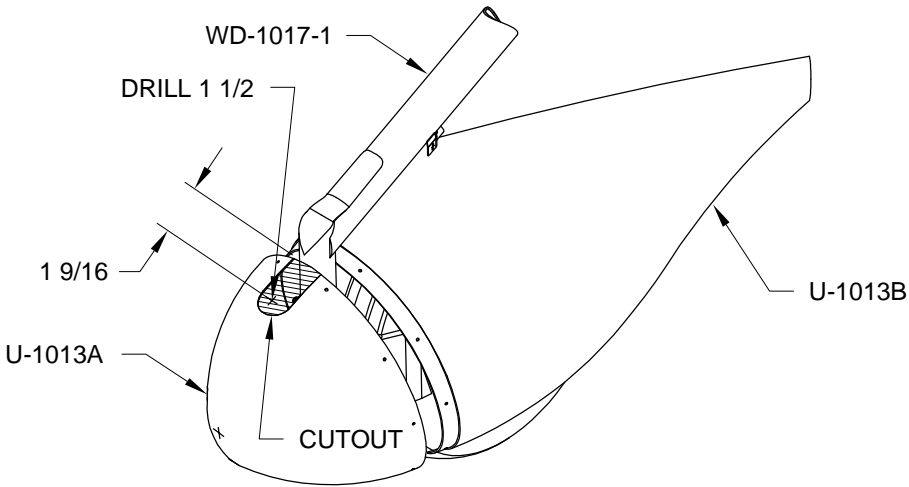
ATTACHING THE BRACKETS AND THE WHEEL FAIRING
